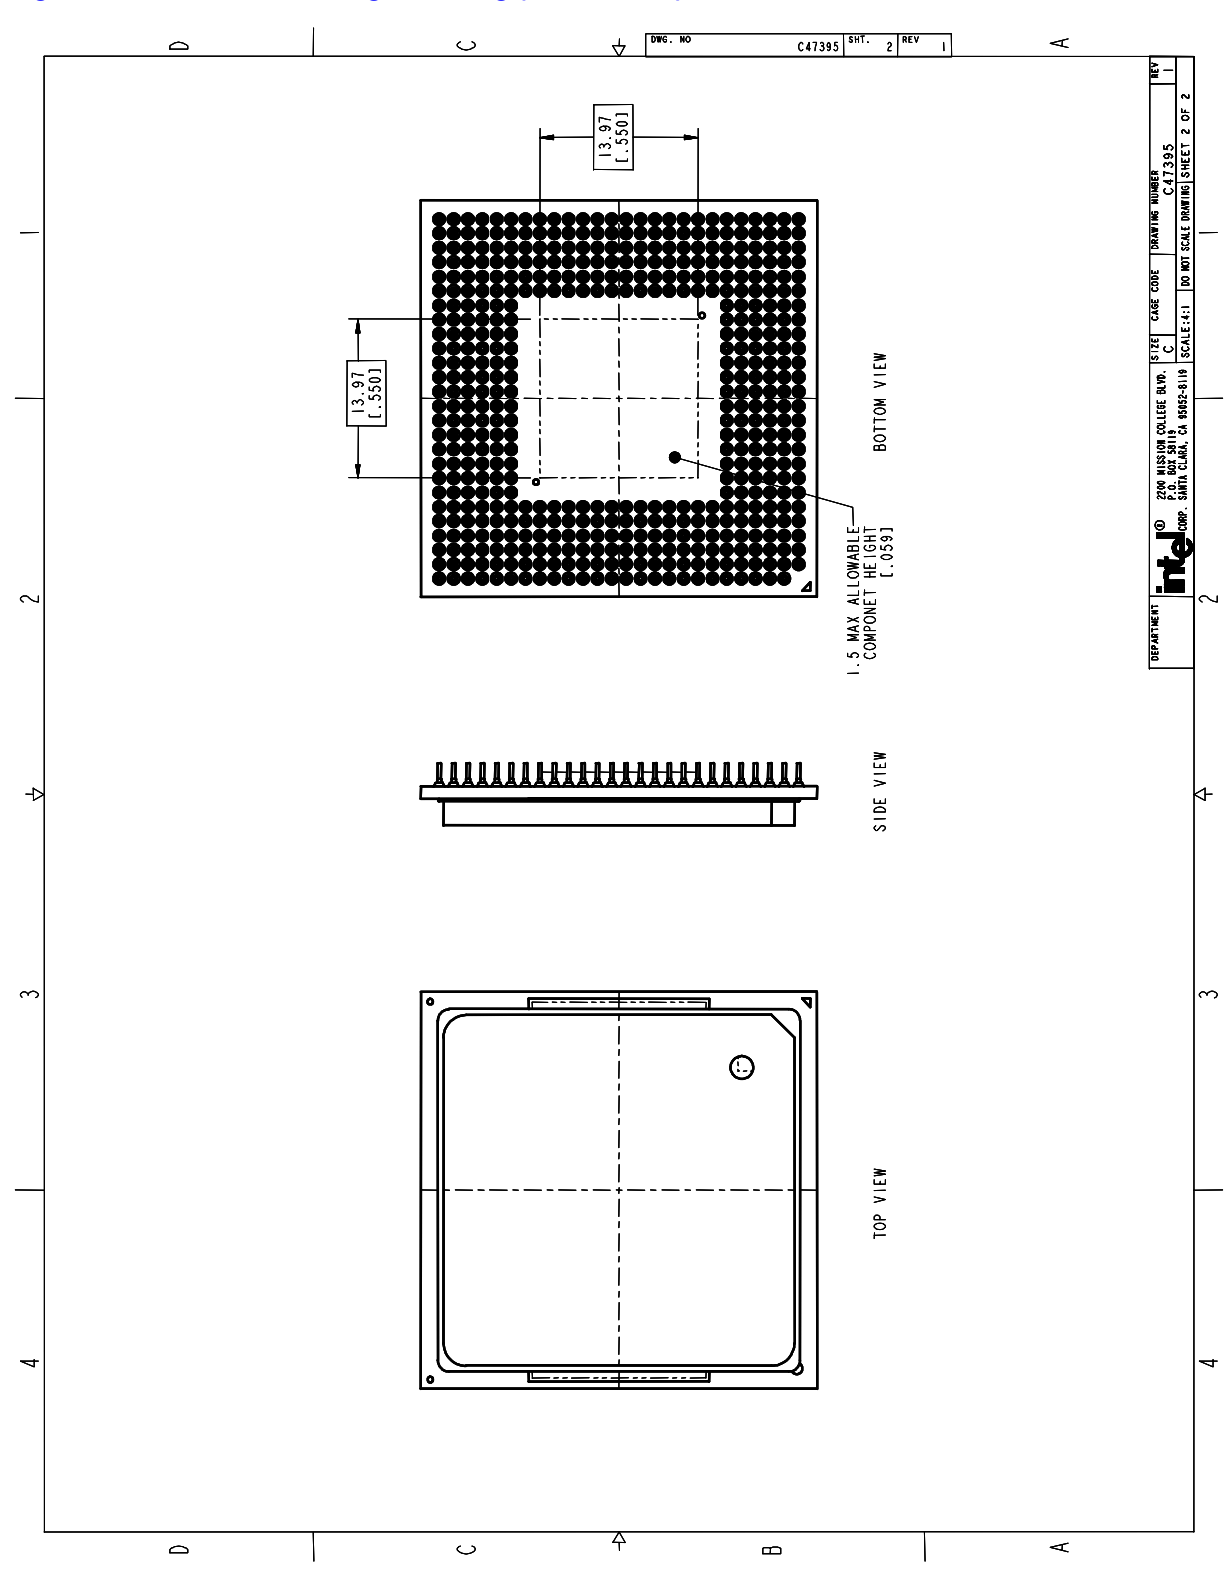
Processor Package Drawing (Sheet 2 of 2)
